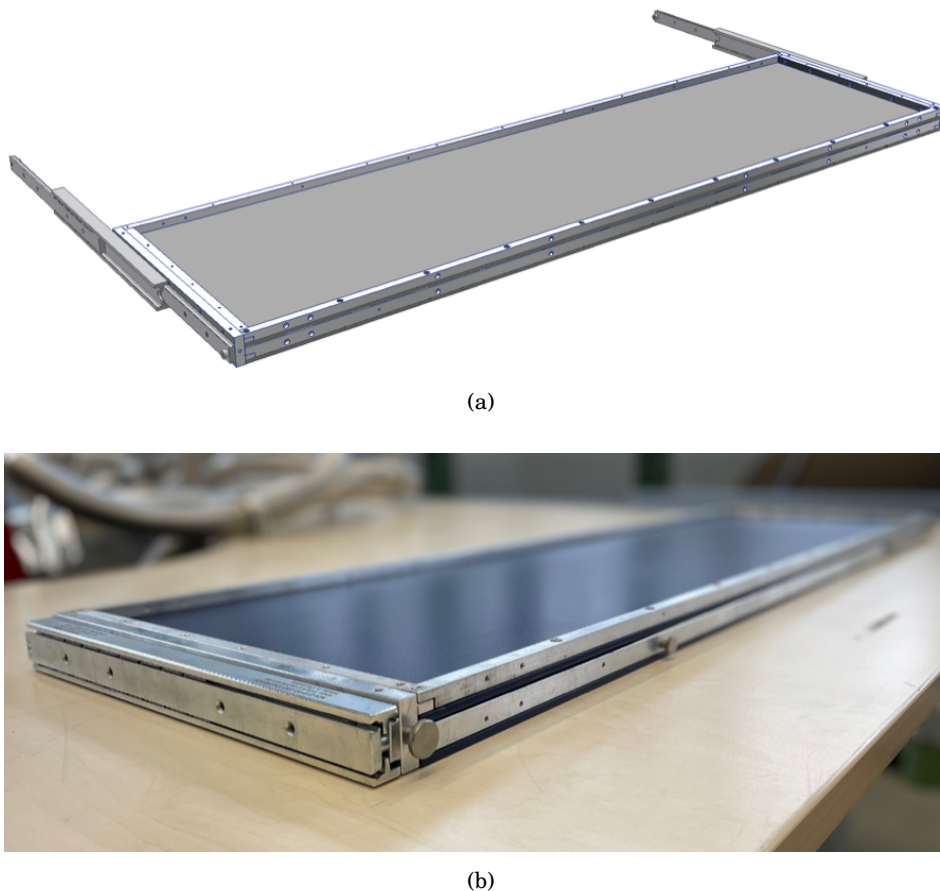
Design of the veto system drawers: CAD model (a) and the assembled version (b). Each drawer consists of two levels, each of which is built from a 4 mm steel sheet and a frame of aluminum profiles. The steel sheets are powder-coated for corrosion protection (RAL 5011, steel blue, semi-matt).
